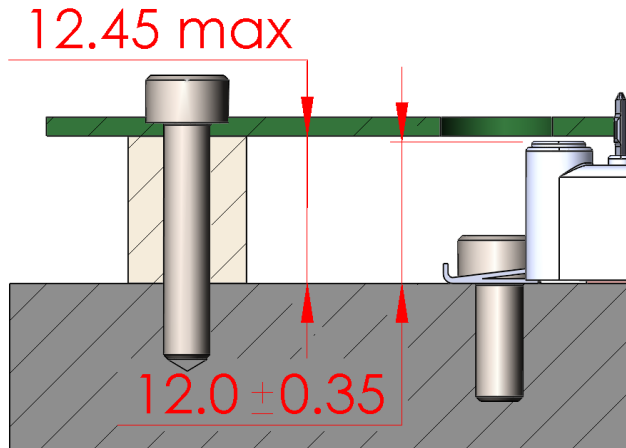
Air Gap Indicating No PCB Mounting Screws Needed
